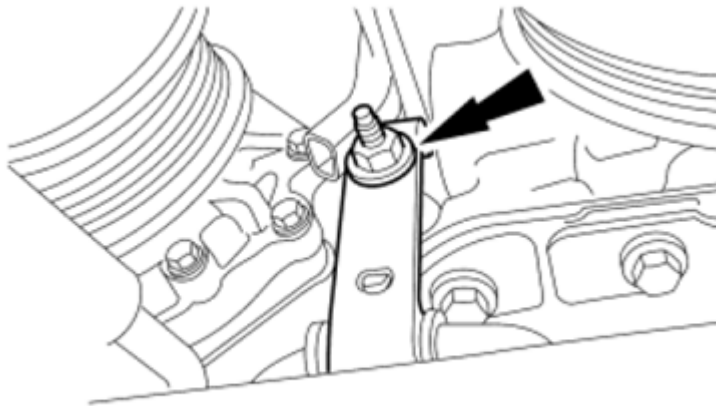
Locating Transmission Cooler Tube Support Bracket
